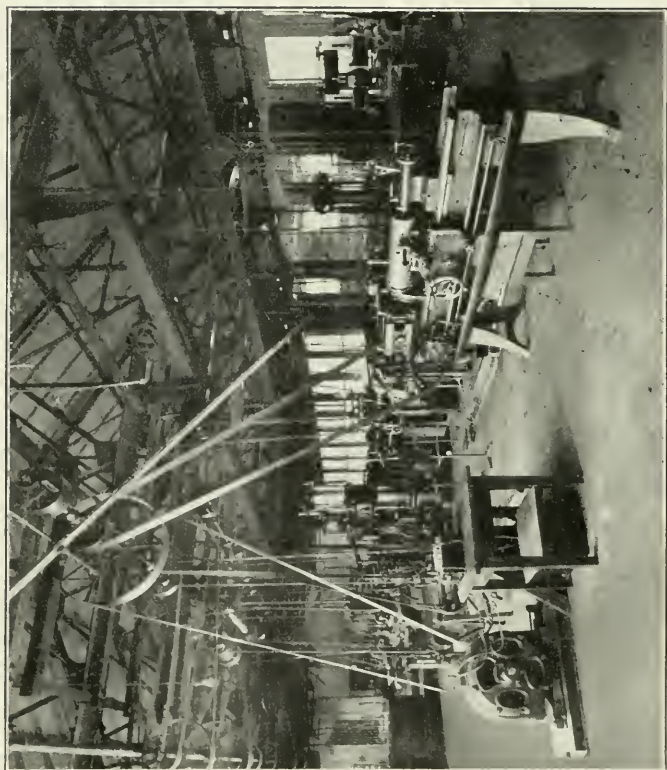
VIEW IN THE UNIVERSITY OF ILLINOIS MACHINE SHOP SHOWING LOCATION OF LATHE AND MOTOR DRIVE USED IN TESTS WITH HIGH-SPEED TOOL STEELS
